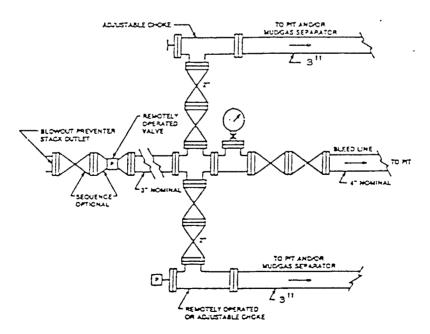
Typical choke inamifold assembly for SM rated w pressure service — surface installation.
